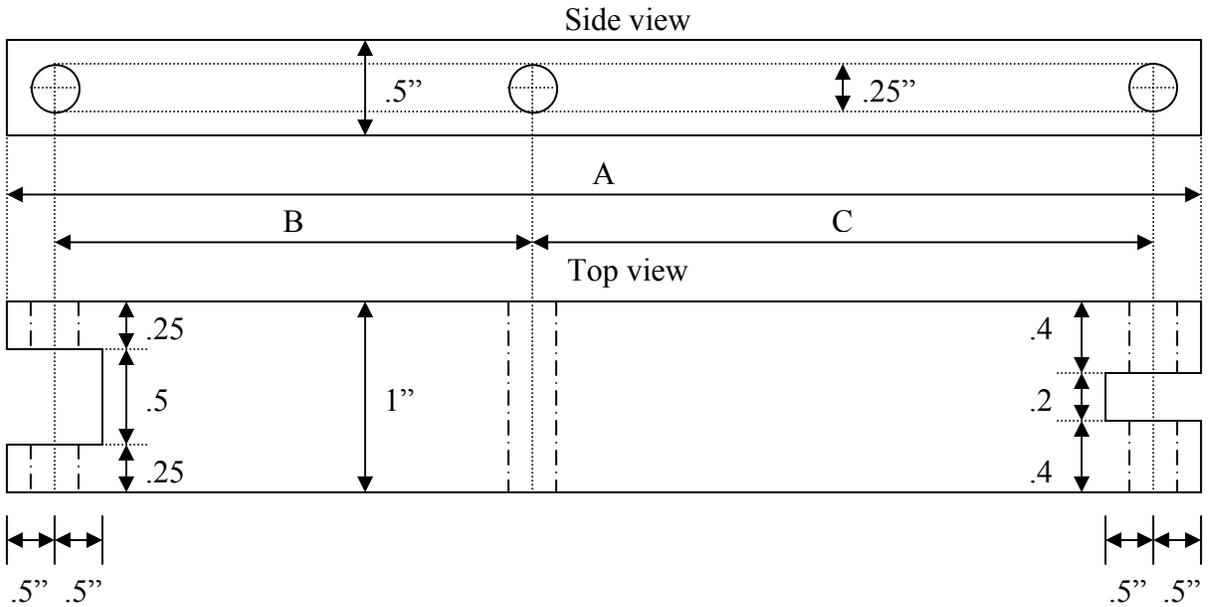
Lever Dimensions and diagram. Dimensions A, B, and C vary depending on lever position.
